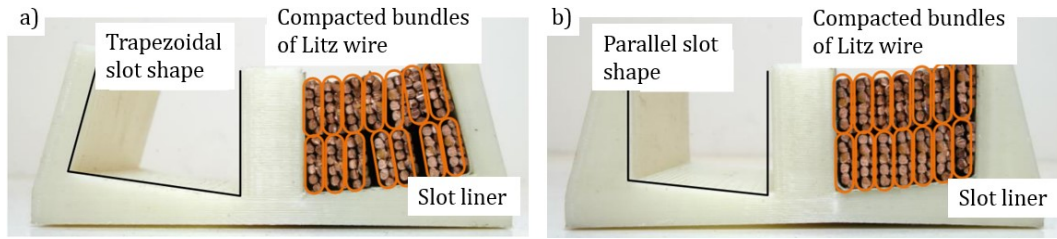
Rapid-prototyped sectors of stator assembly with Litz wire winding, a) trapezoidal shaped slot geometry, b) parallel sided slot geometry [58]
